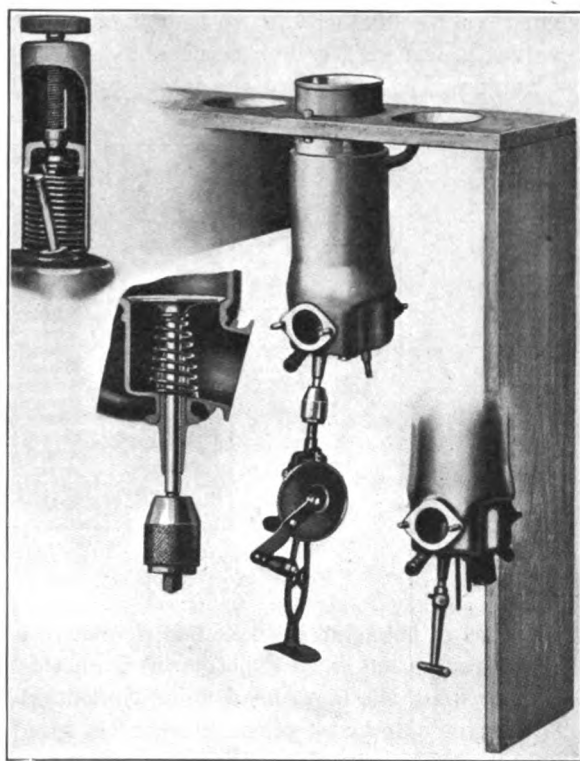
Perspective drawing of illustrating method of securing valves and valve spring.
